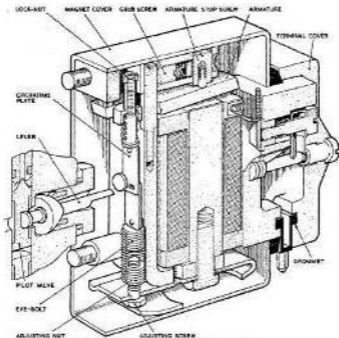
Magnet assembly, Type C326Y, Mk. B
